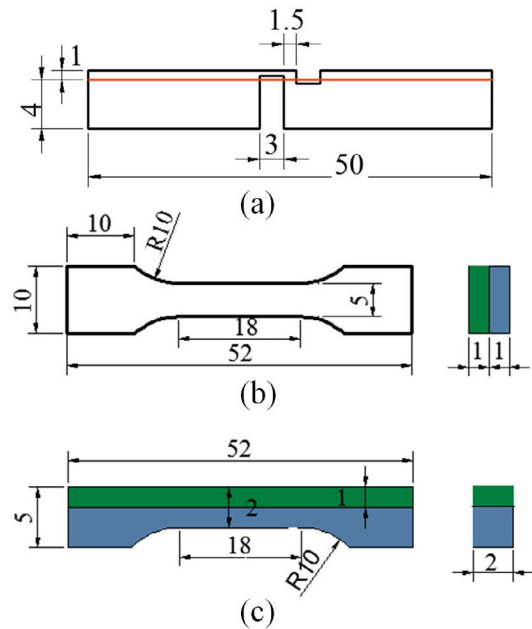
Schematic of specimen shape under testing. (a) tensile-shear specimen; (b) tensile specimen; (c) non-symmetrical tensile specimen.
